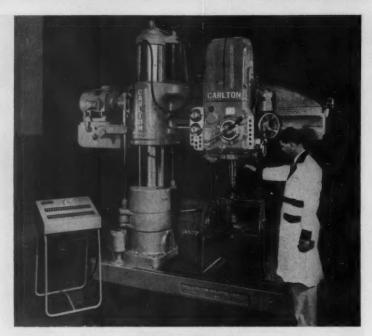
Carlton radial drill equipped with pre-selector and programmer
